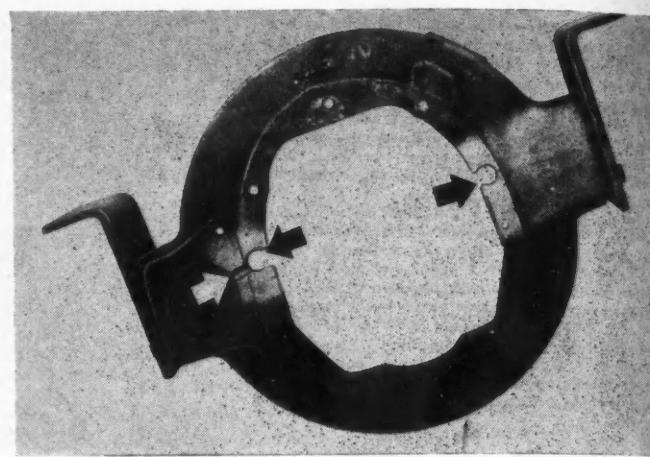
, upper left, a water pump housing, and Fig. 2, the sprocket at left, had unusual breaks, in that the cracks did not extend through the castings' extremities. Fig. 3, above, shows breaks the repair of which is explained in the text and next page
